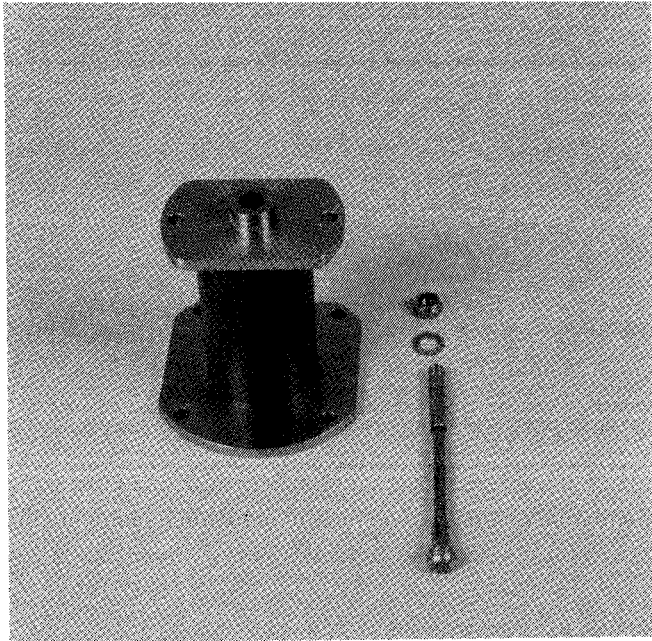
Lumbar spine of the P1½ (spine cable is disassembled).
